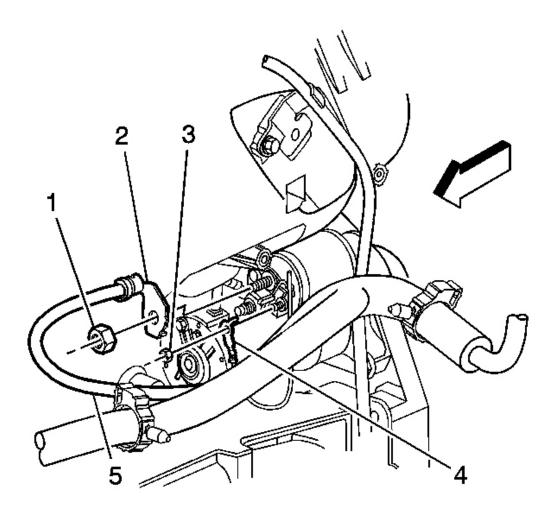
Locating Positive Battery Cable Courtesy of GENERAL MOTORS CORP.
